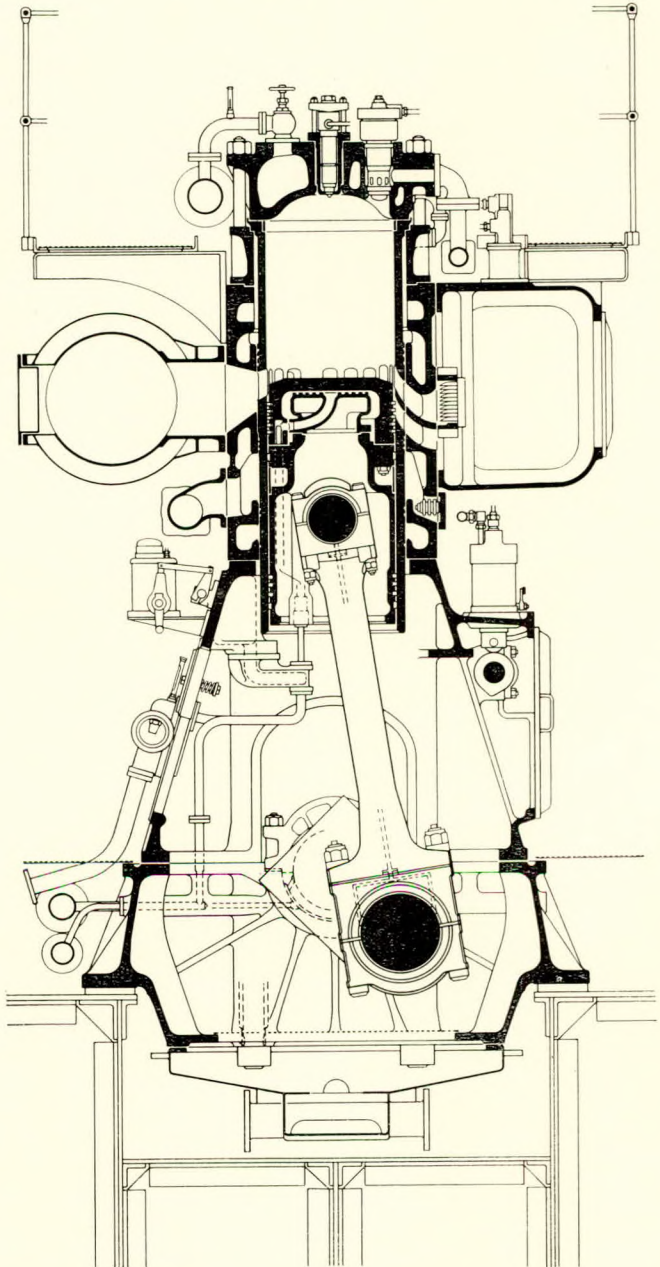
Cross-section of a standard trunk piston engine of 48-cm. bore
